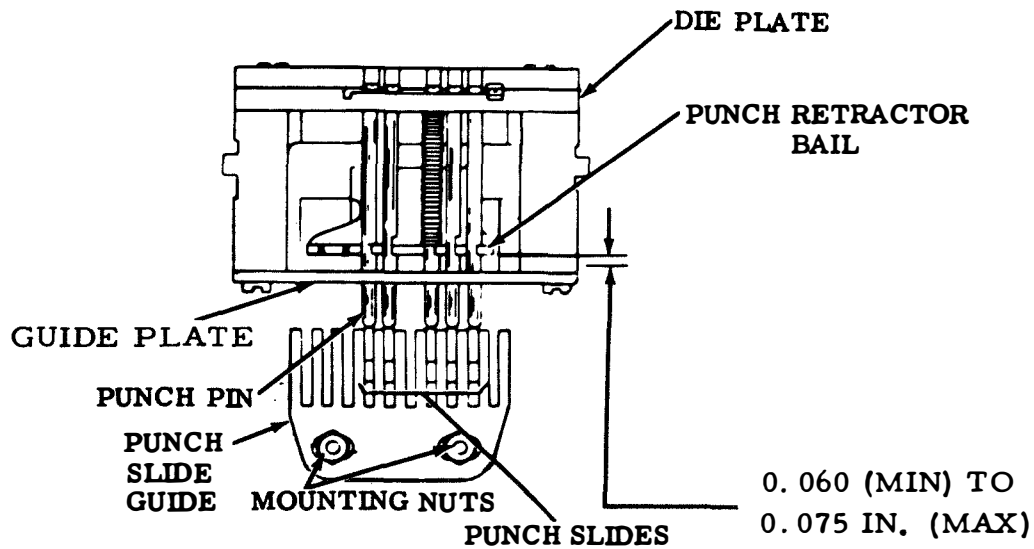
Punch Pin Penetration and Punch Slide Guide for Chadless Tape - Left Side View
